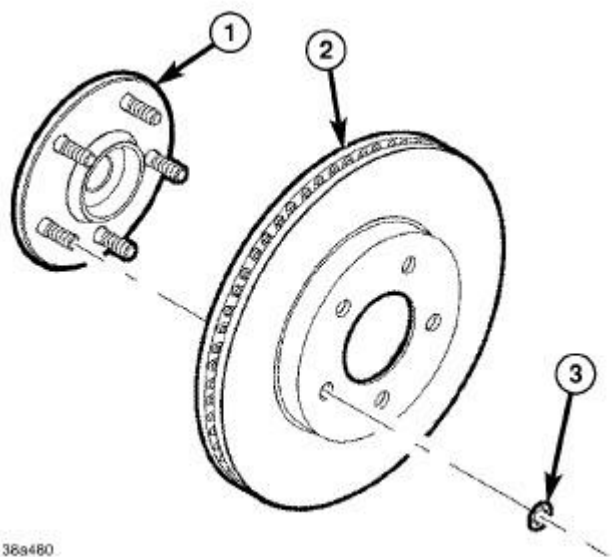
VENTED BRAKE ROTOR MOUNTING
